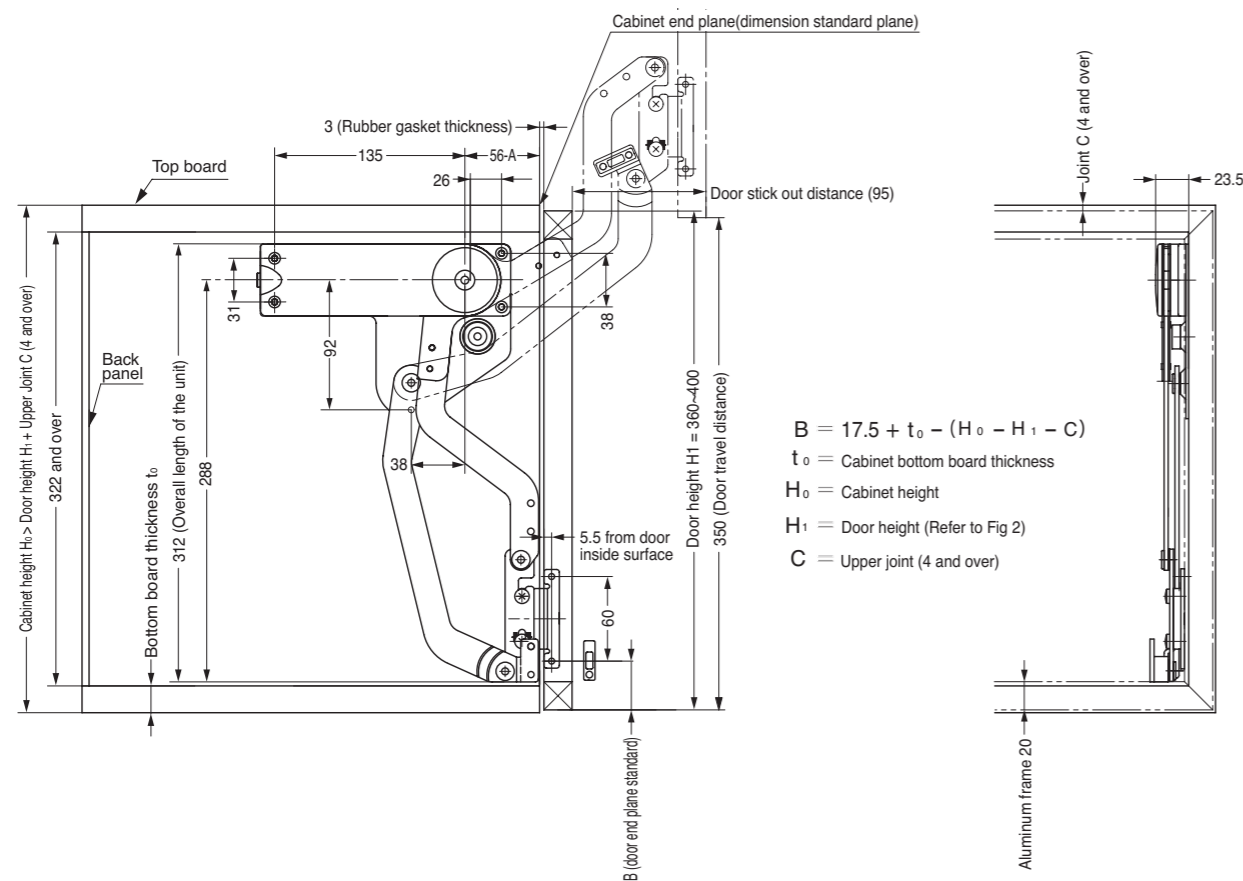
Mounting dimensions for installing to 20mm width aluminum frame door
